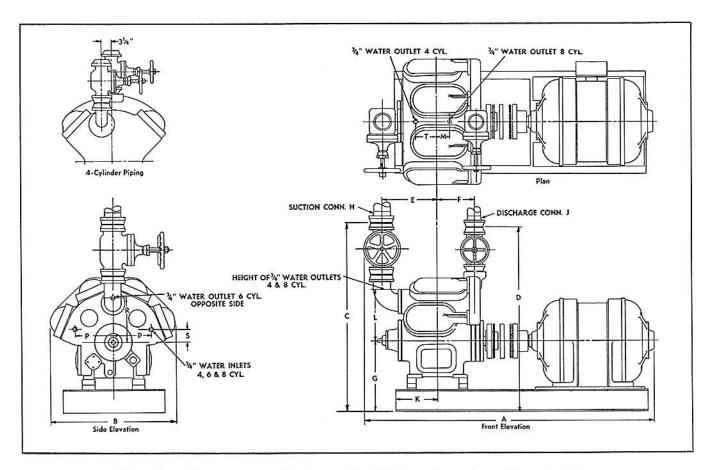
Dimensions - 4, 6 and 8 Cylinder Ammonia - Direct Drive
